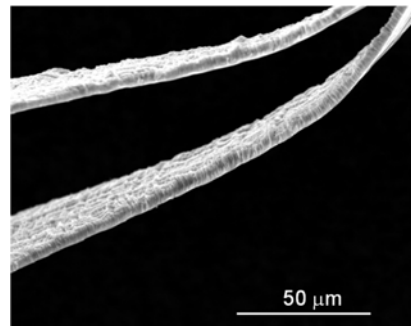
(a) is an SEM photograph of cutting chips generated during the machining of type A grooves on aluminum alloy. The length of each chip unit is approximately 400 μm, 1/4 of the length of a single groove wave (1.57 mm). This indicates that the chip flow in this case is smooth, without chip adhesion and accumulation on the tool rake face, as shown in Fig. 12. Figs. 16(b) and (c) are magnified views of chip surfaces and sides. Unlike the
